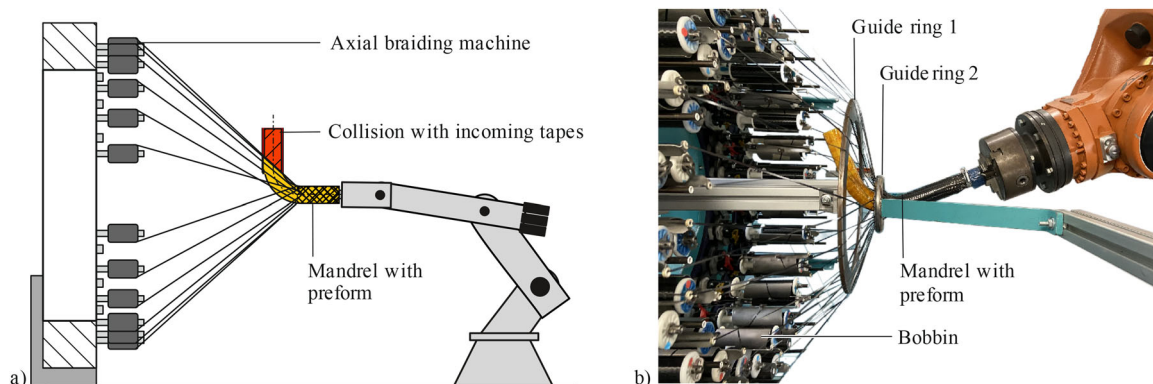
Tape-mandrel collision in a conventional braiding process (a); Double guide ring setup (b).
